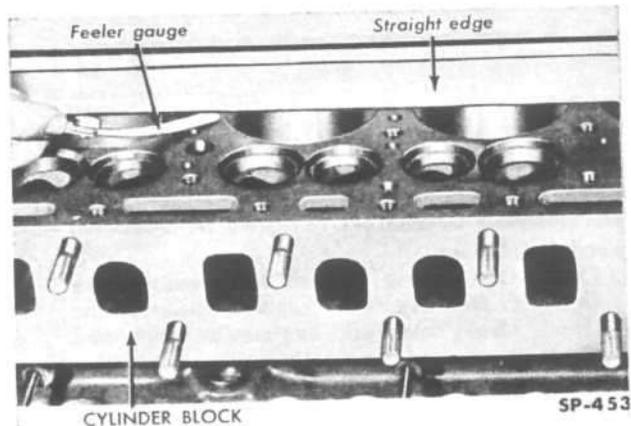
CHECKING CYLINDER BLOCK FOR DISTORTION
